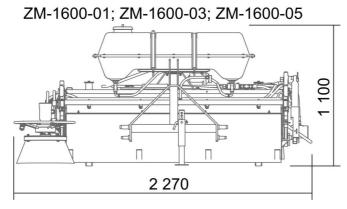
A External dimensions of ZM-1600-01; ZM-1600-03; ZM-1600-05
